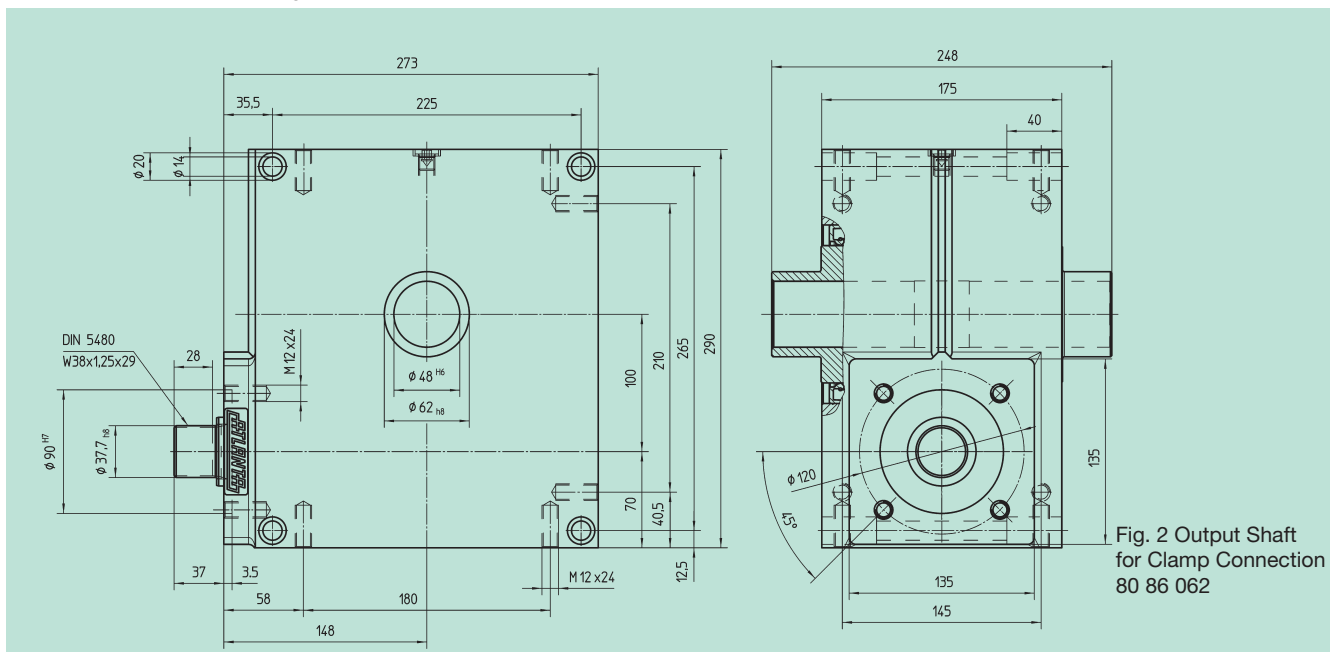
Output Shaft for Clamp Connection 80 86 062
